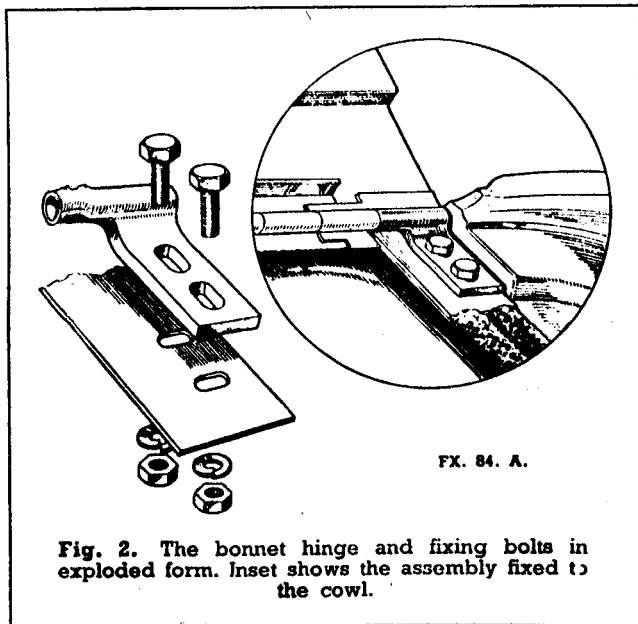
The bonnet hinge and fixing bolts in exploded form. Inset shows the assembly fixed to the cowl.
